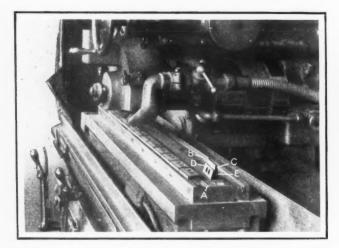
Magnetic Chuck Used in Grinding Four Different Surfaces of Straight Bevel Gear Generator Cutters
